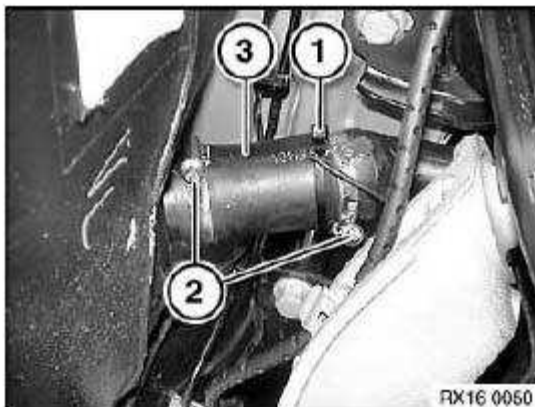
Rubber Sleeve, Hose Clamp And Cable Tie
